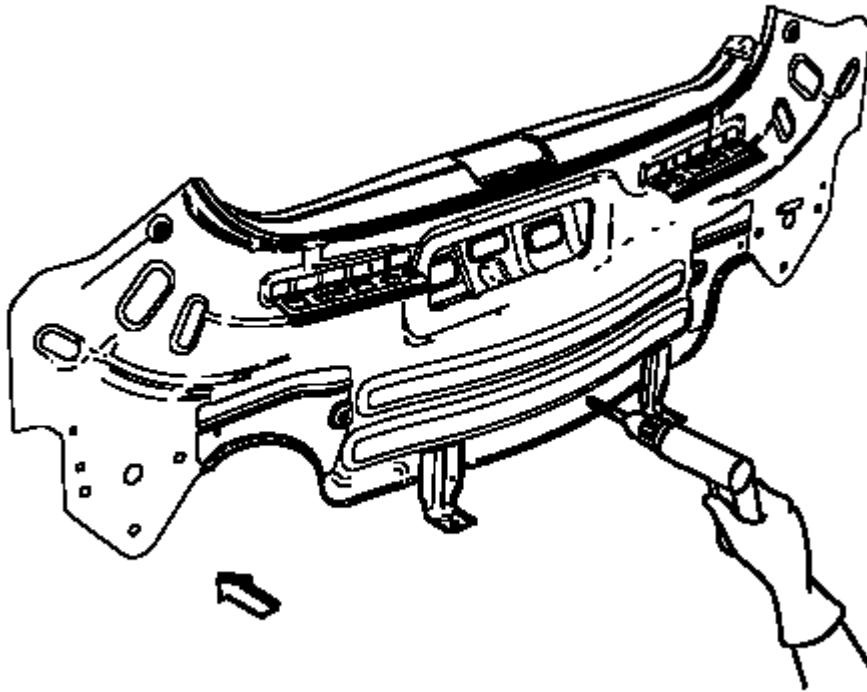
Drilling 8 mm (5/16 in) For Plug Welding Along Edges Of Body Rear End Panel
